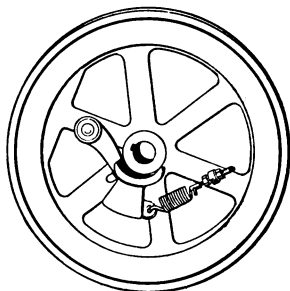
Flywheel and Governor Weight, Novo Engine.
